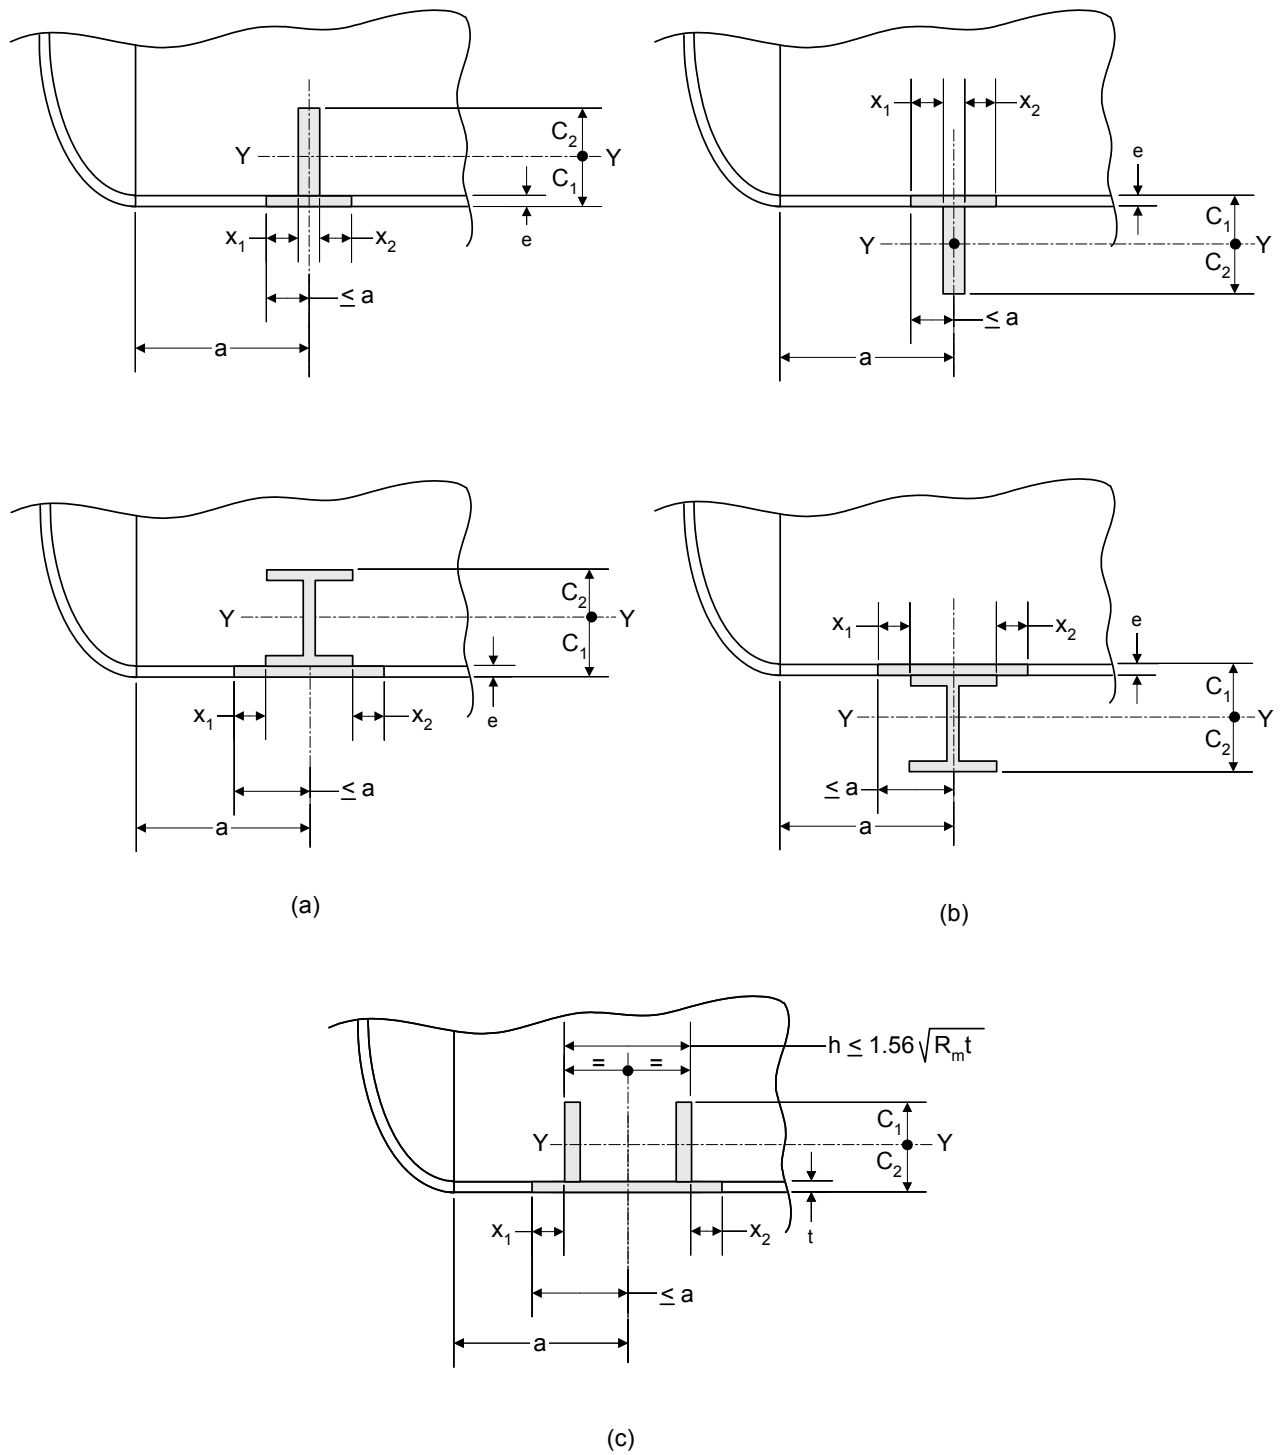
Cylindrical Shell With Stiffening Rings in the Plane of the Saddle
